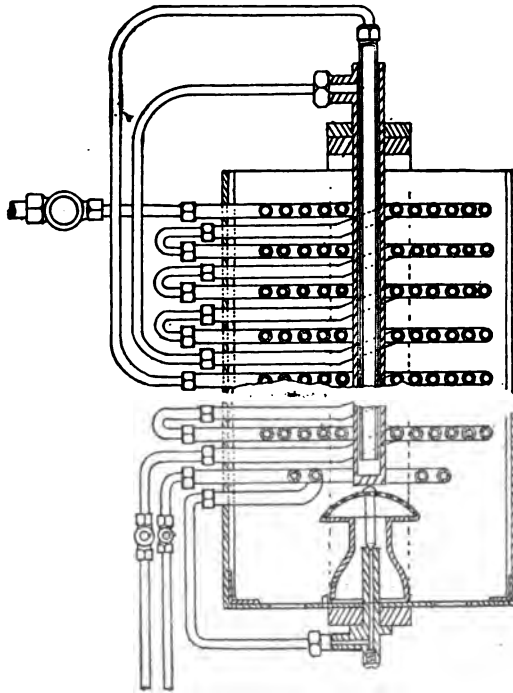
Sectional Elevation of the Blaxton Flash Generator.
